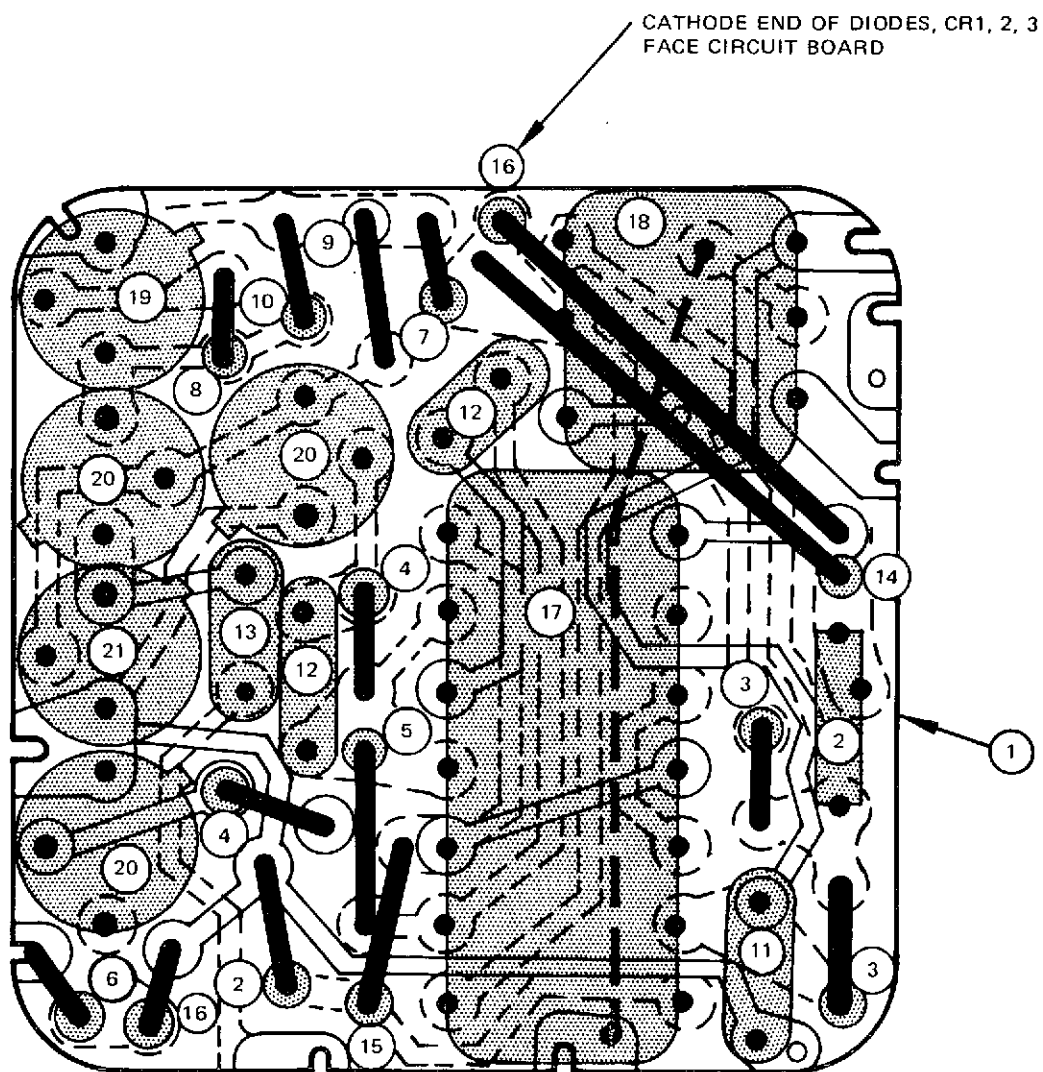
CIRCUIT BOARD ASSEMBLY – TOP, DC CONTROLLER
